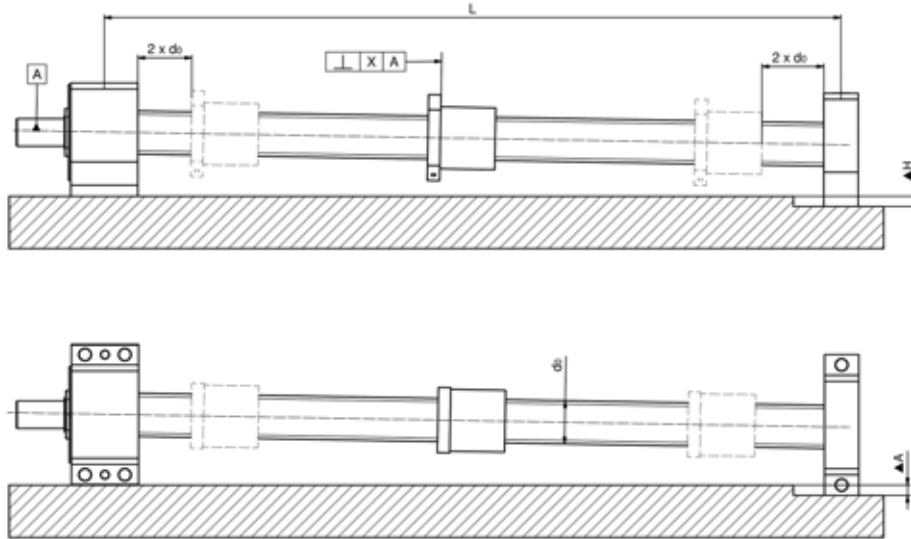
Definition of the assembly tolerances of Ball Screws
